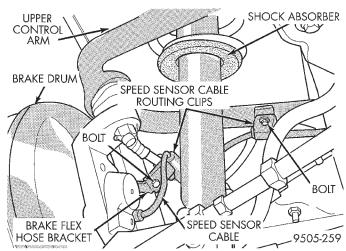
Rear Wheel Speed Cable Routing And Attachment
